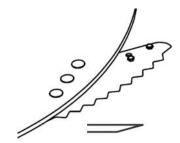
Knives Turned Over, With the Tungsten Coating on Top
